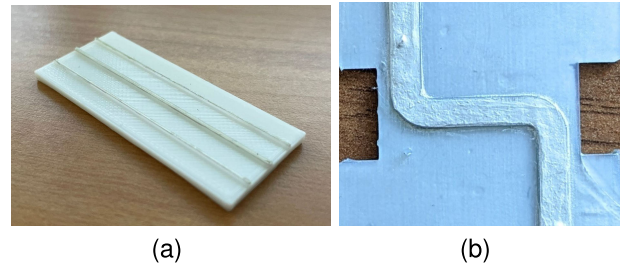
Microstrip lines manufactured with the 3-D printing-based embossed-surface patterning process. (a) Photograph of the prototype on PLA (FDM). (b) Photograph of the prototype on the Clear resin (SLA).
